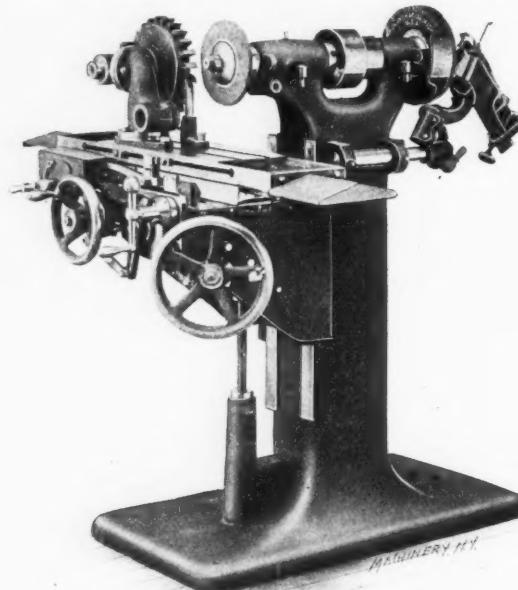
Cutter Grinding Attachment in Use on Table of Surface Grinder. Note Drill Grinding Attachment on Rear of Column.
